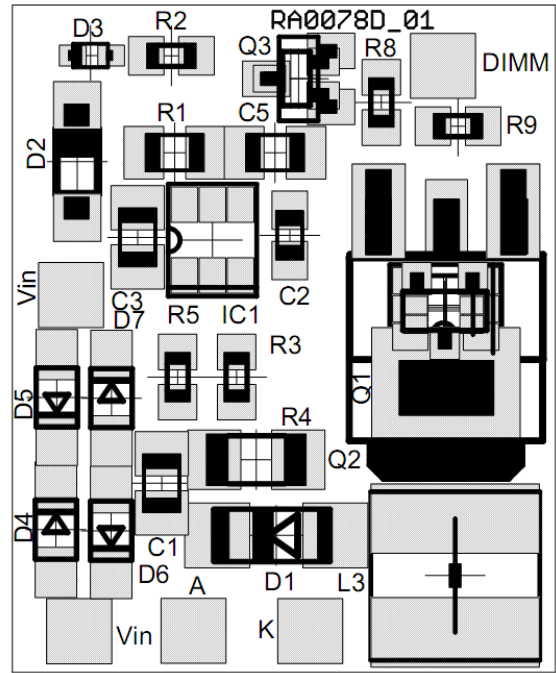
The Component Side (Several Transistor Packages are Possible to Use)
